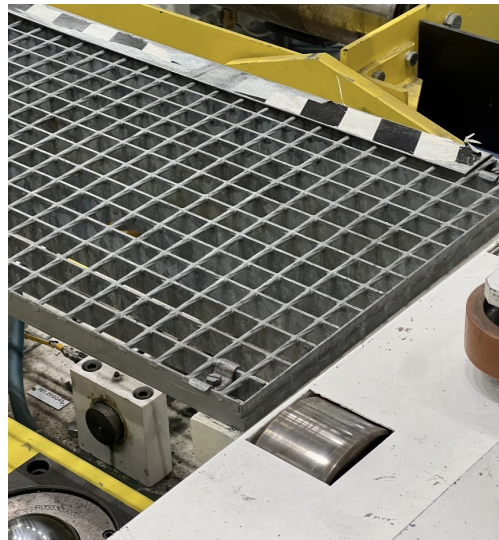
Planned example design of the conveyor belt for battery assembly line (Volvo cars, 2023)
